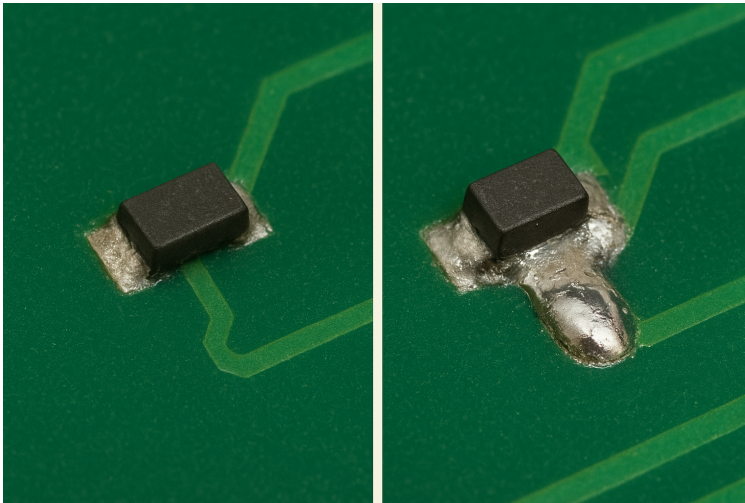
Cold Solder Joint And Excess Soldered Component
